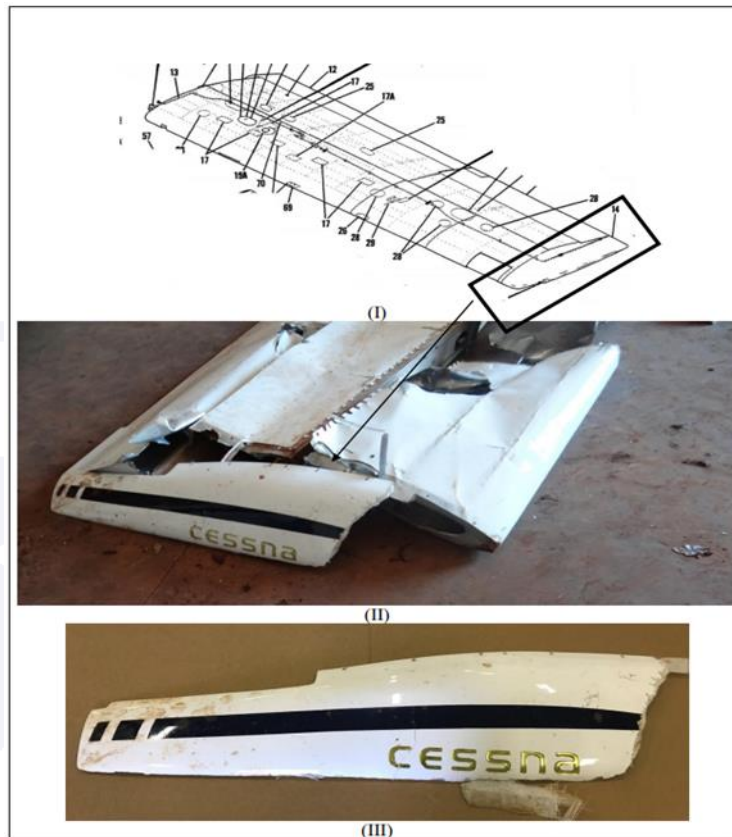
Schematic view of the wing (I), mockup of the right wing (II), and detail of the fractured fairing (III).
